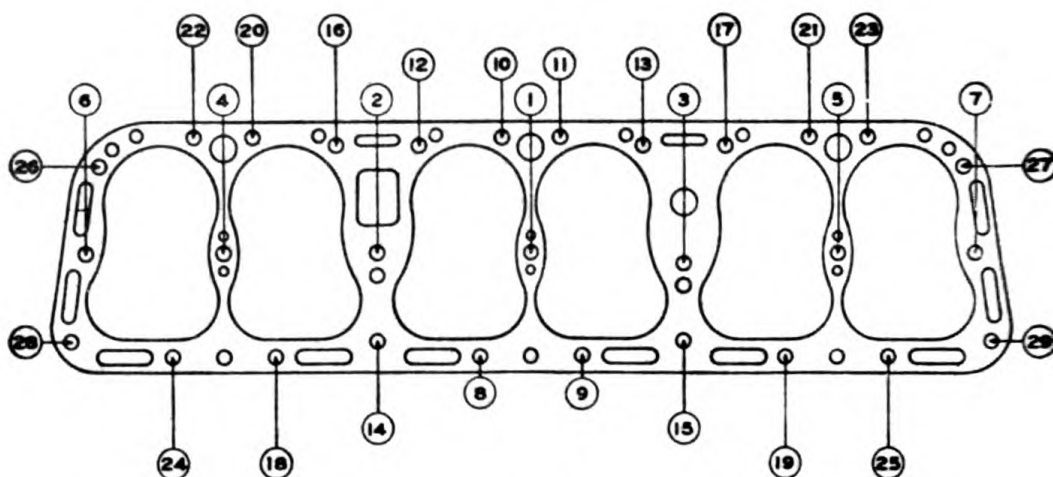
Sequence of Tightening Cylinder Head Stud Nuts.
